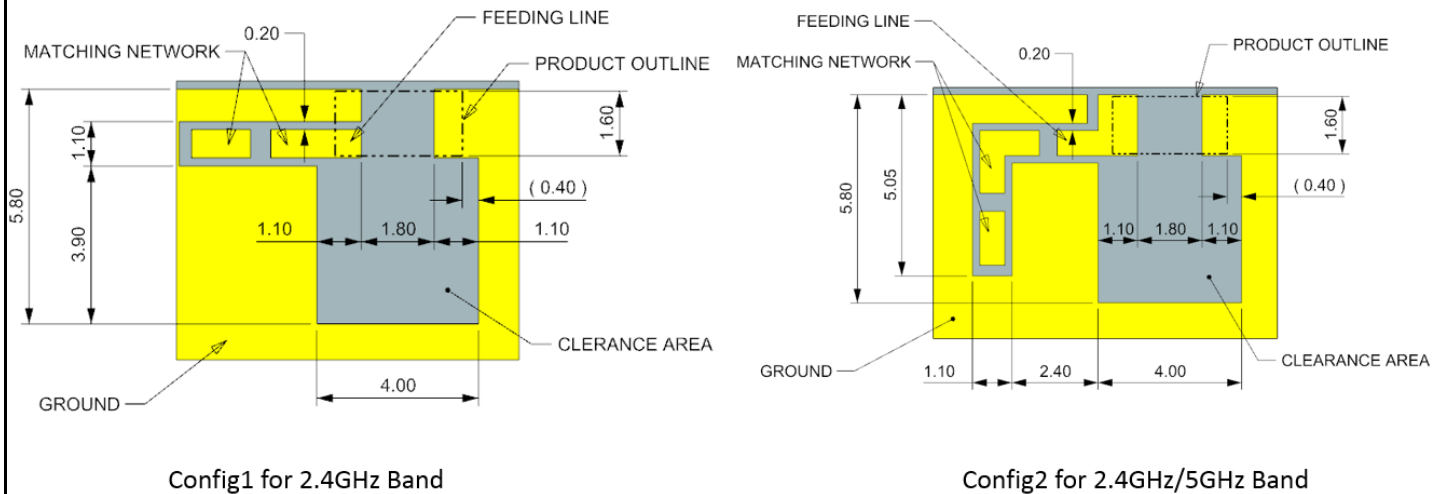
RECOMMENDED FOOTPRINT ON PCB FOR SOLDERING
